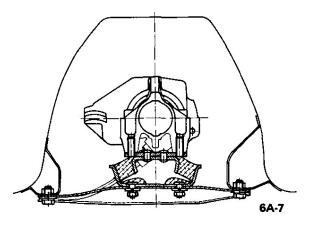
A-7 Transmission Support Bolts . Opel 1900 and Manta Series
